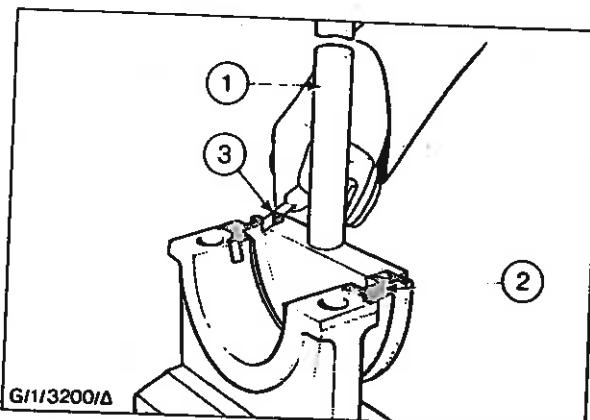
Fitting Crankshaft Rear Oil Seal - (Main Bearing Cap Shown)
